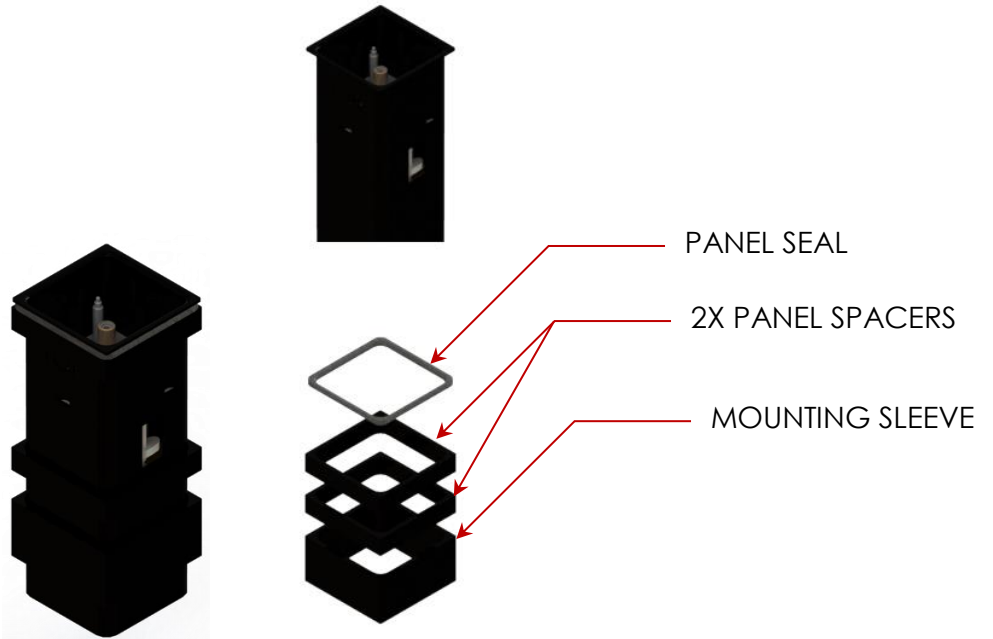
Panel Spacers, Mounting Sleeve and Panel Seal (S100 shown without pushbutton for clarity)
